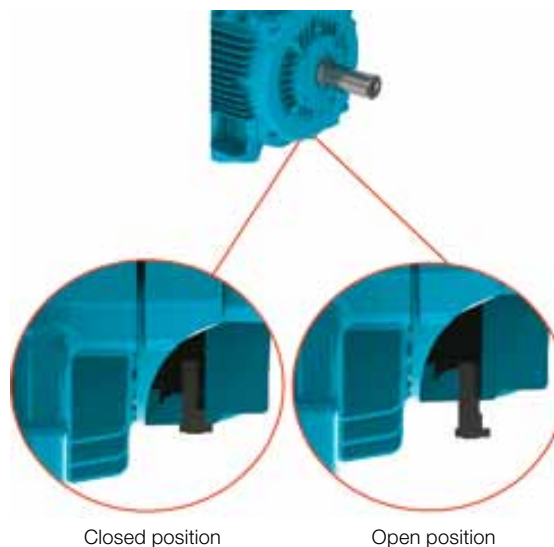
Detail of the rubber drain plug mounted in closed and open position.
